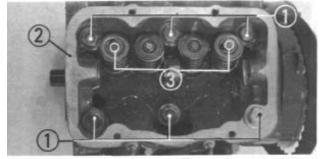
① 8 mm bolts ③ Tappet clearance adjuster ② Cylinder head
